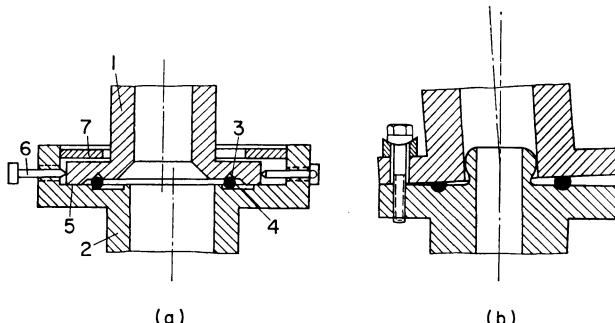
O-ring seals to transmit radial motion: (a) with sliding O-ring. After Garrod⁴³⁰ (*Courtesy of The Institute of Physics and The Physical Society*); (b) by compression of an O-ring
